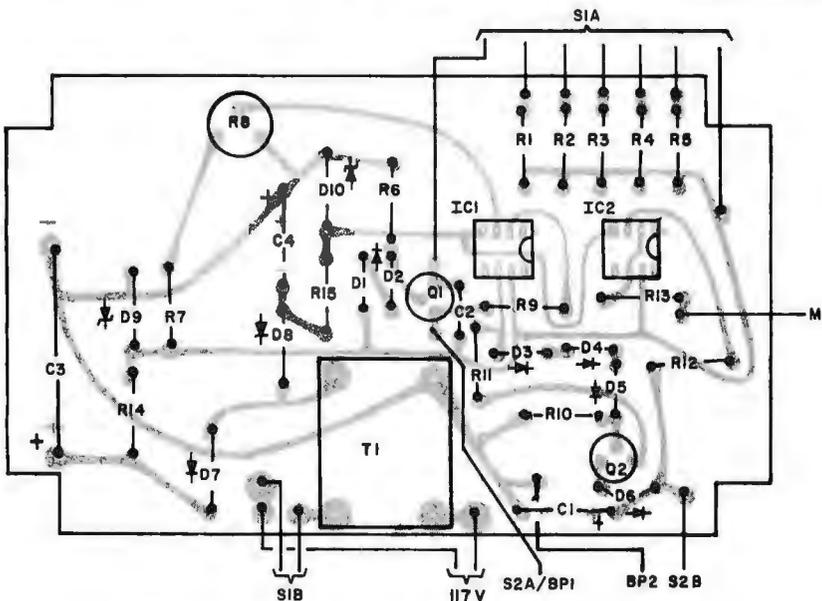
Actual-size etching and drilling guide is above, component layout at left.
